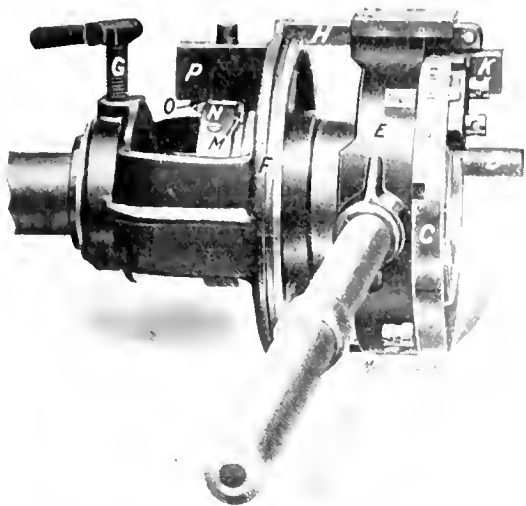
Side View of Pipe Die-stock, showing Frame, Leader Ring and Graduations on Side of Cam Plate.
